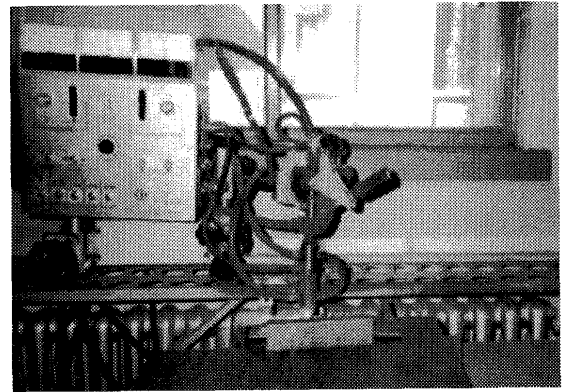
The CO₂ arc welding process with the new system (Electrode: H08Mn₂Si, 1.2mm diameter, 100% CO₂, welding current 150 A)
